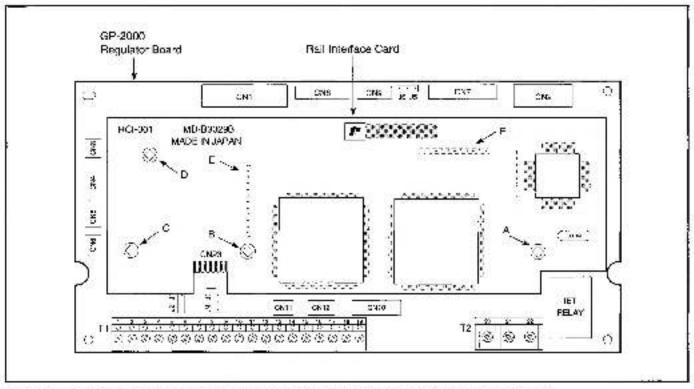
Installation of the Bail Interface Card to the GP-2000/VTAC V Regulator Board.
